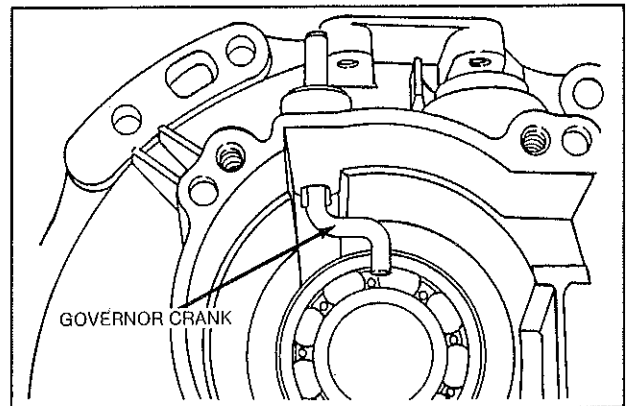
Installing Governor Shaft Before Code Date 8808090
